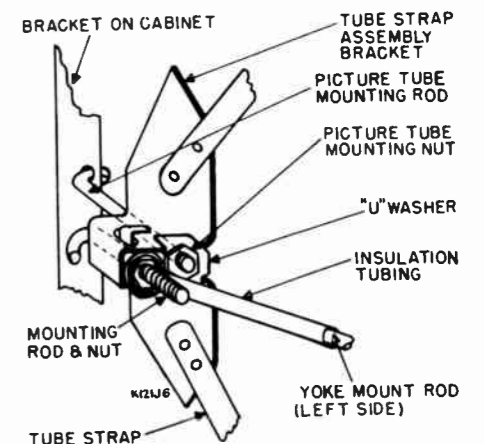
Tube Strap Assembly Mount, Model 21T2
